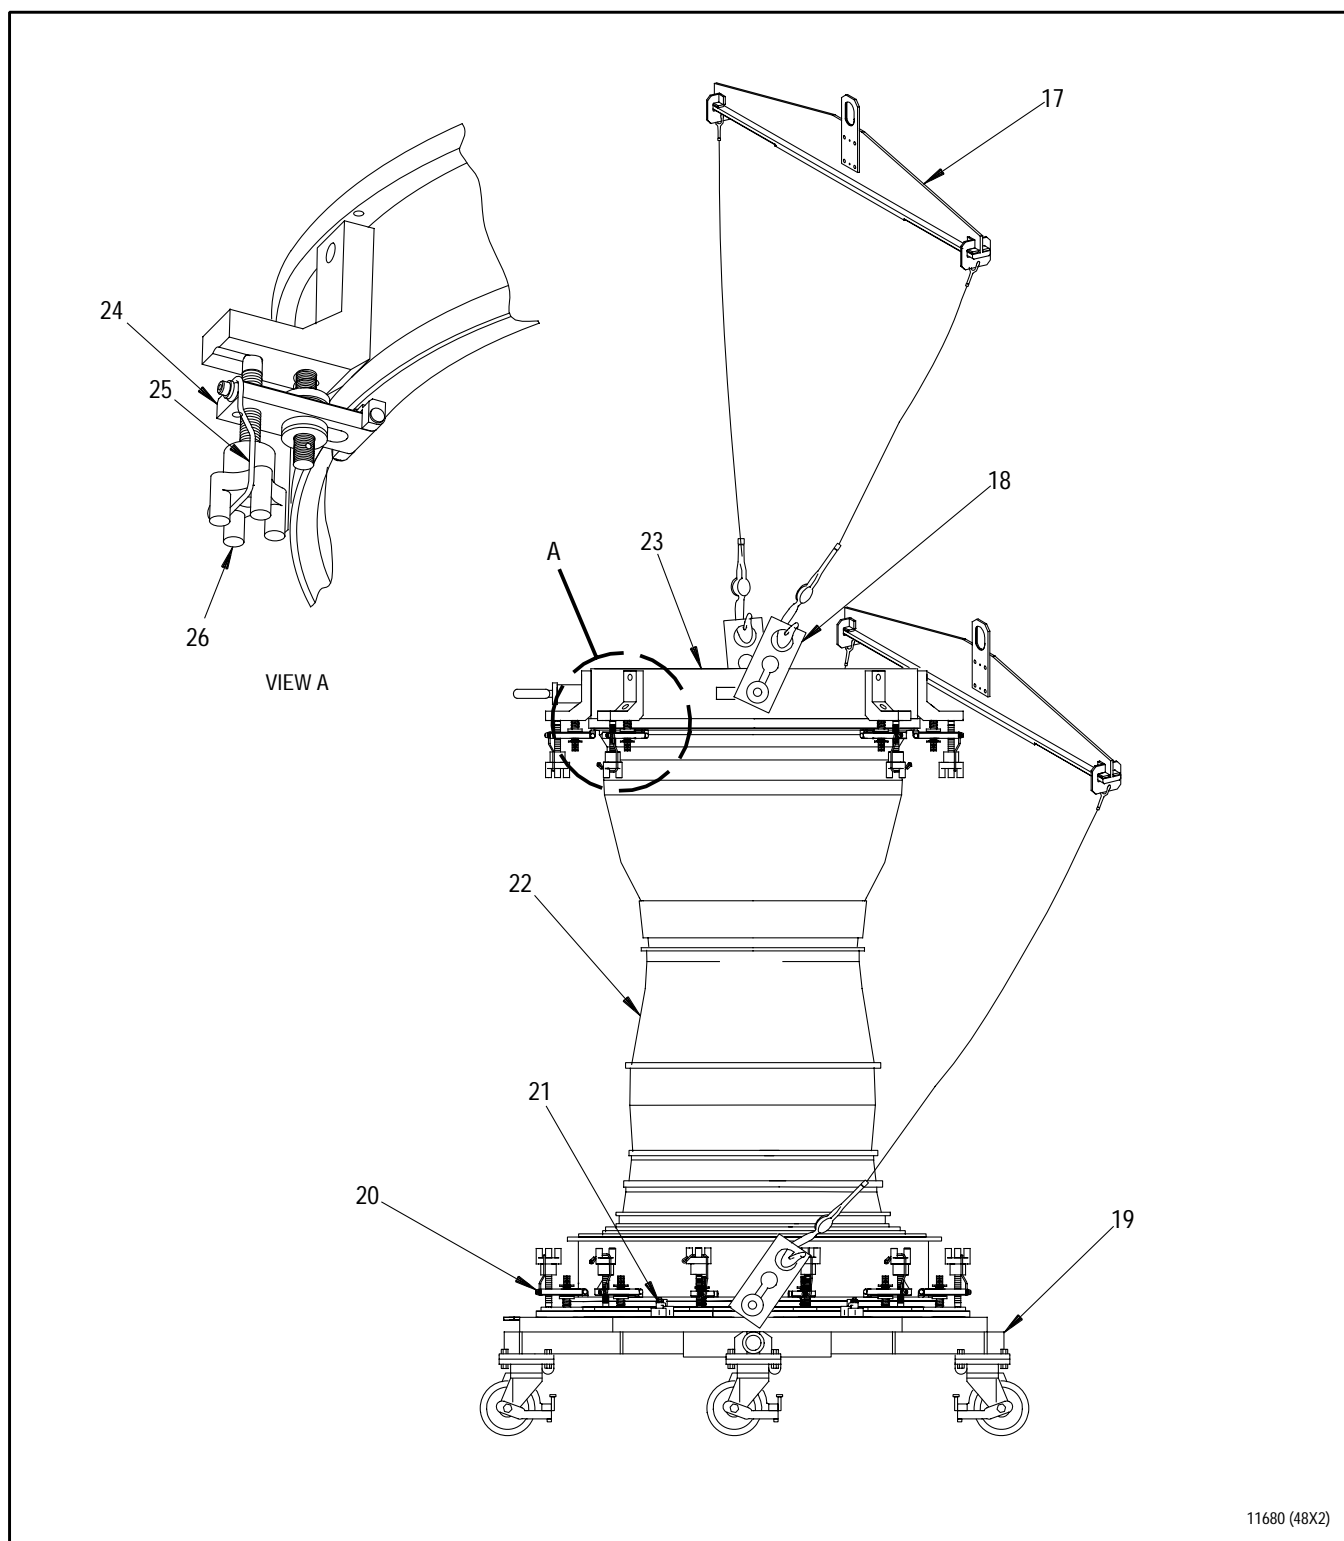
Front and Rear Lifting Rings - Removal (Sheet 3 of 3)
